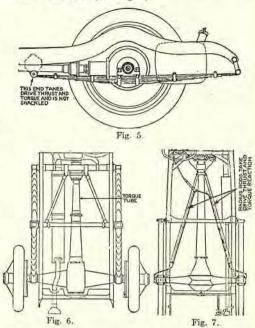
"The Hotchkiss drive." A semi-elliptic spring is used to take the thrust. The forward end of the spring is not shackled, but oscillates on a pin, and this takes the thrust and torque. The rear end is shackled and is free o move under stress.
